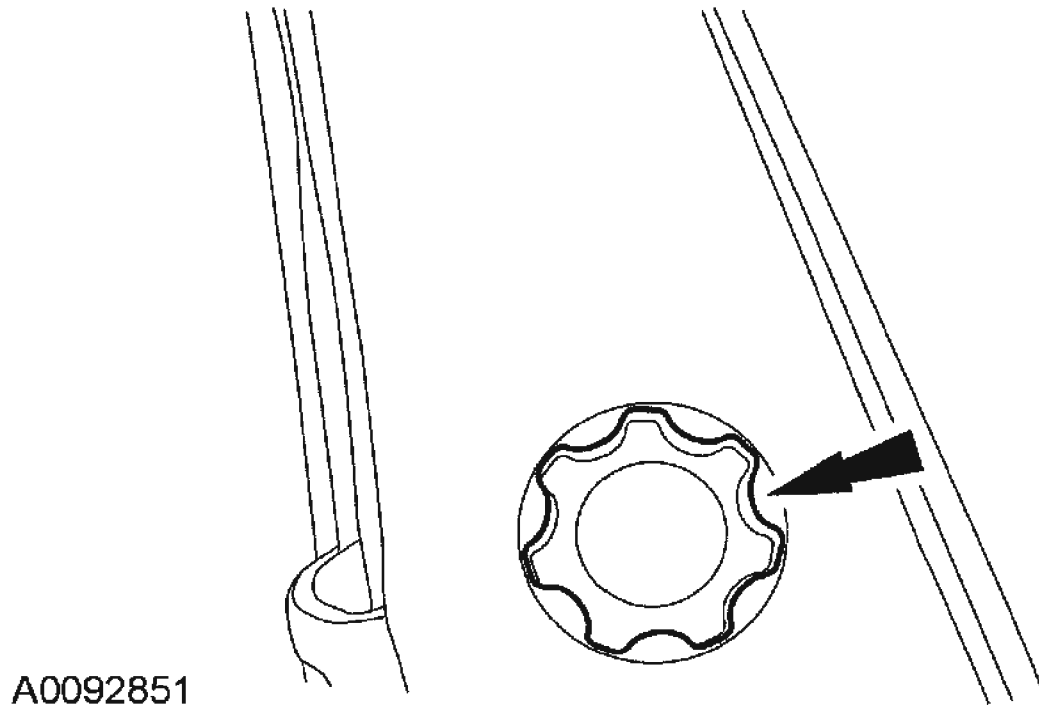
Attaching Seat Back Trim Cover J-Clips
